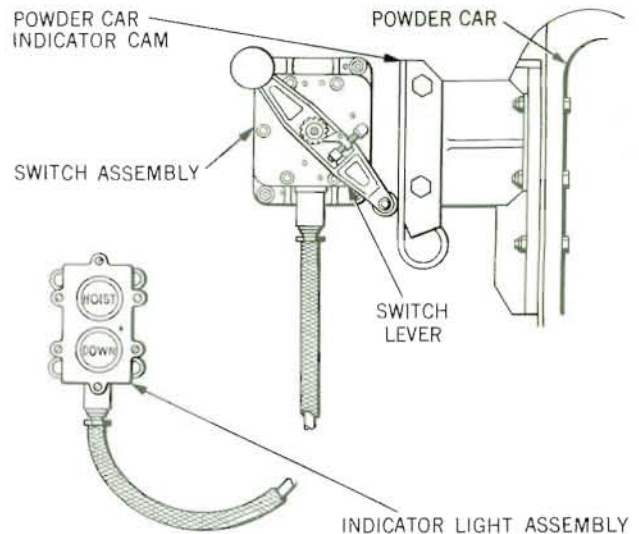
Powder Hoist Indicator and Switch Assembly - Trunk Lower End
